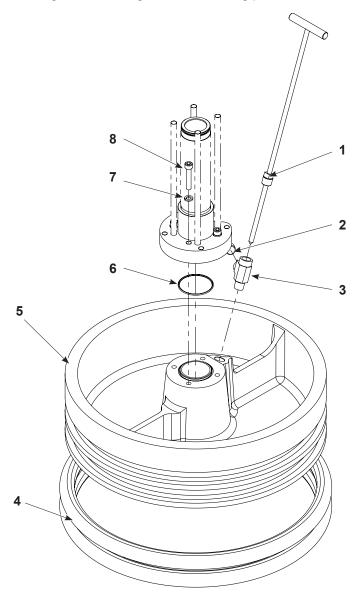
55-Gallon Follower Module Equipped With Follower Seals
